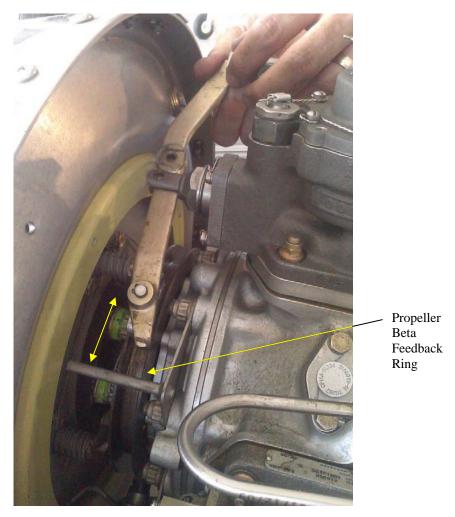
Slide Beta Arm to Disengage Propeller Beta Feedback Ring
